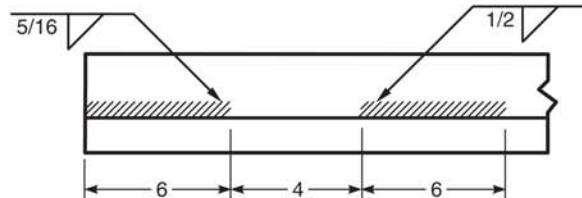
Application of the Fillet Weld Symbol
